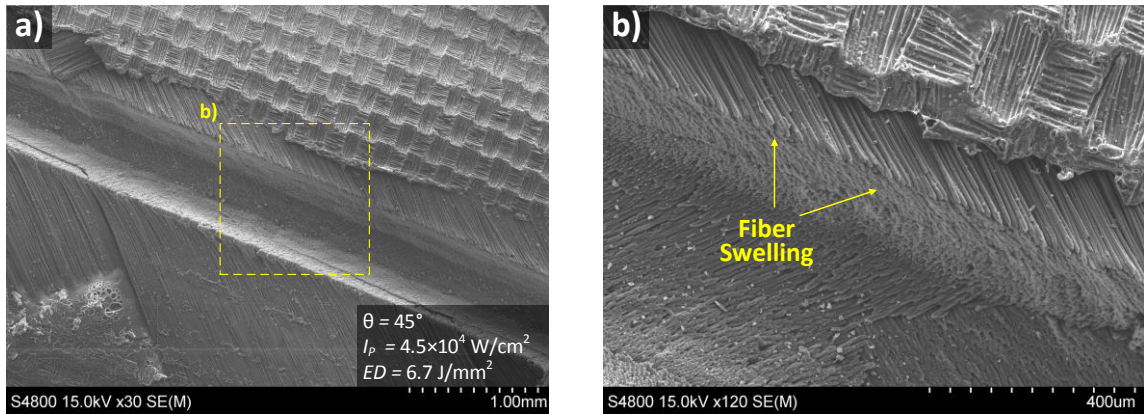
Surface SEM micrograph of laser cutting of cross-ply CFRP using CW mode: (a) machining damage is thermal-based, mechanical defects are removed; (b) fiber swelling and matrix recession is observed at machined surface.
